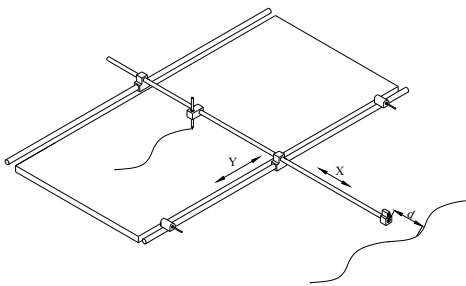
Working mechanism of movable ruler and drawer rod with optical sensor
